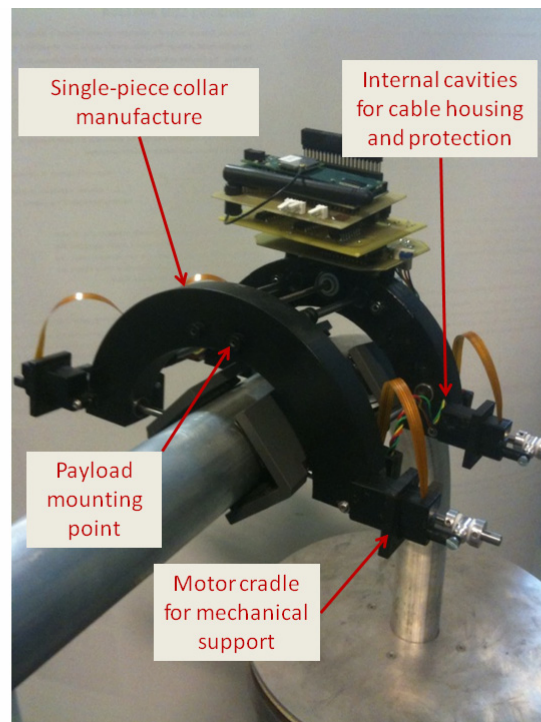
Mark II(r) crawler manufactured using rapid prototyping facilities. Techniques such as this allow complex geometrical shapes to be manufactured as a single part increasing the robustness of the overall product.
